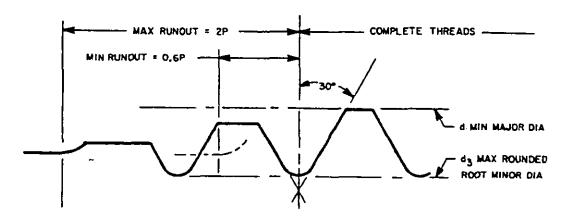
INCOMPLETE FORMED THREADS, PITCH DIAMETER
